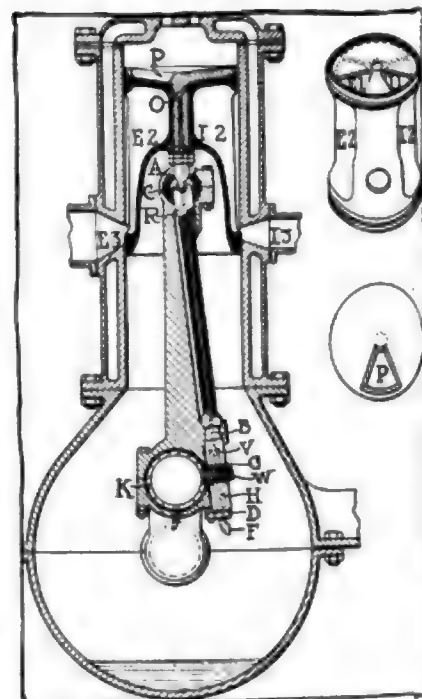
THORNLEY ROTARY VALVE MOTOR
